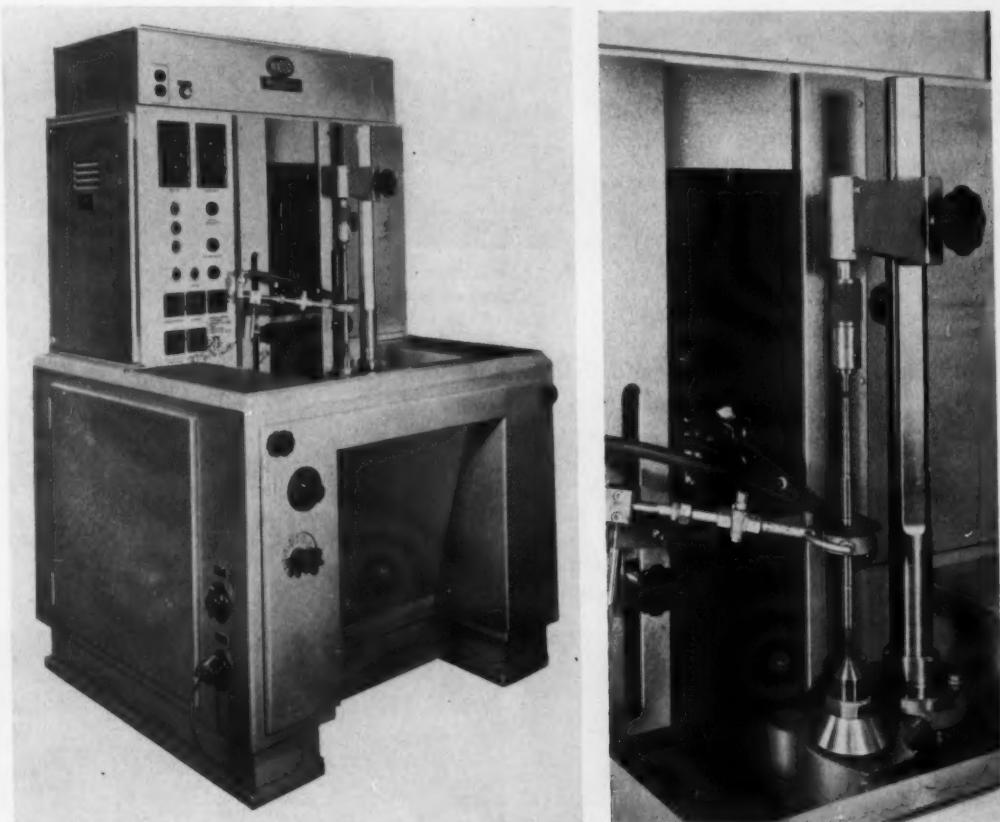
(Left) Universal induction-hardening machine. Fig. 4 (Right) Close-up view of coil, quench ring, and fixture for shaft hardening on Natco-Delapena machine shown at left
